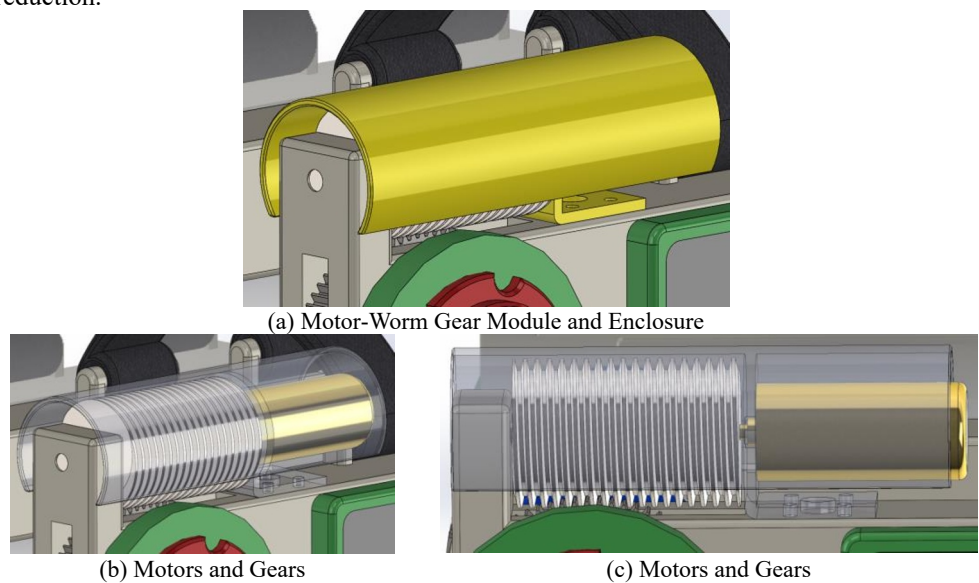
The motor-worm gear module is composed of a motor, a worm gear, and a housing (Photo credit: Original)
